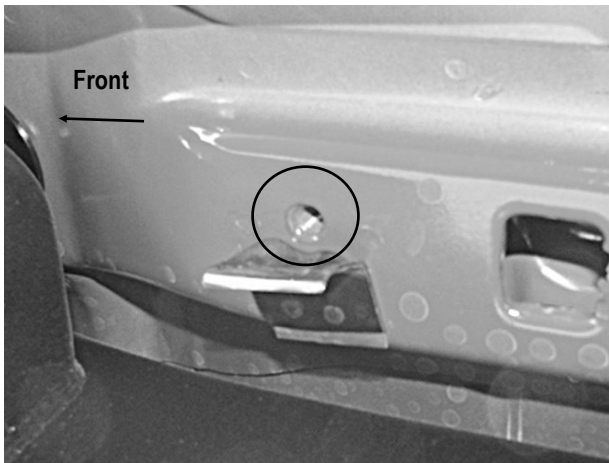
Driver Side Front Mounting Location (Vehicles with open mounting location)
